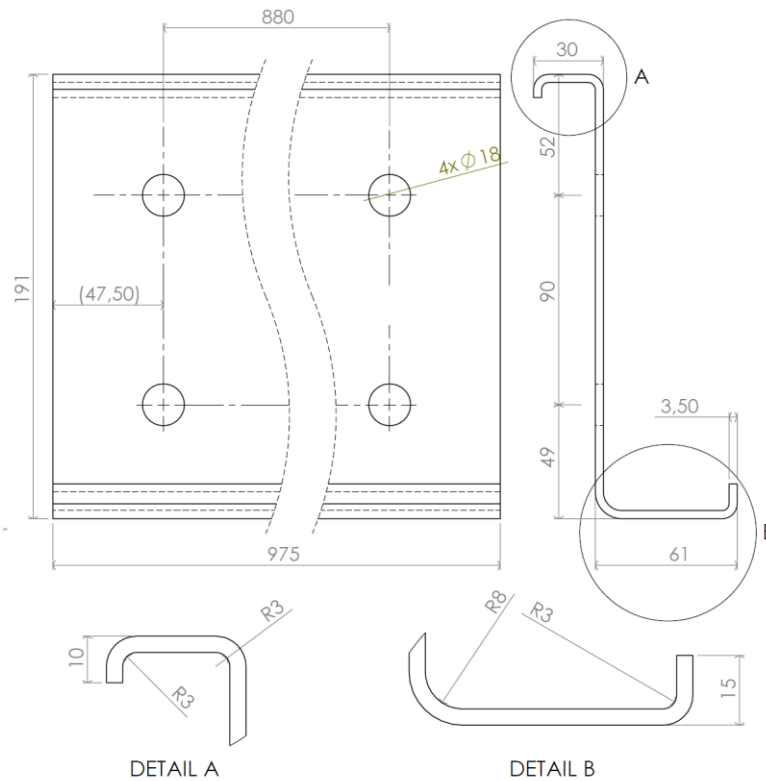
Z-rail's technical drawing (dimensions in mm).
